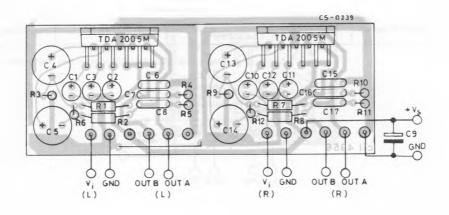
P.C. board and components layout of circuit of Fig. 25 (1:1 scale)
